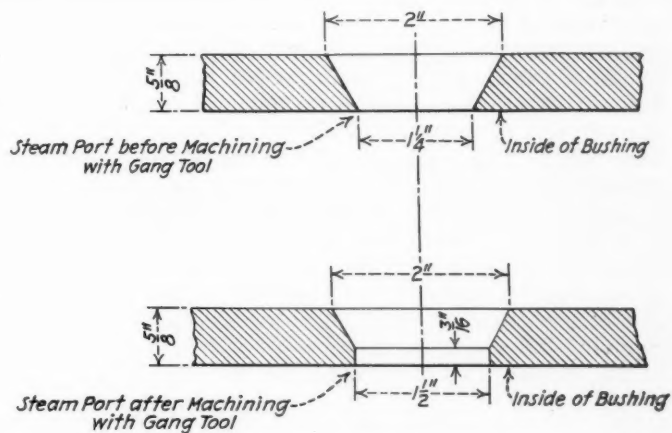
The dimensions to which the port is machined on a boring mill with a gang tool
